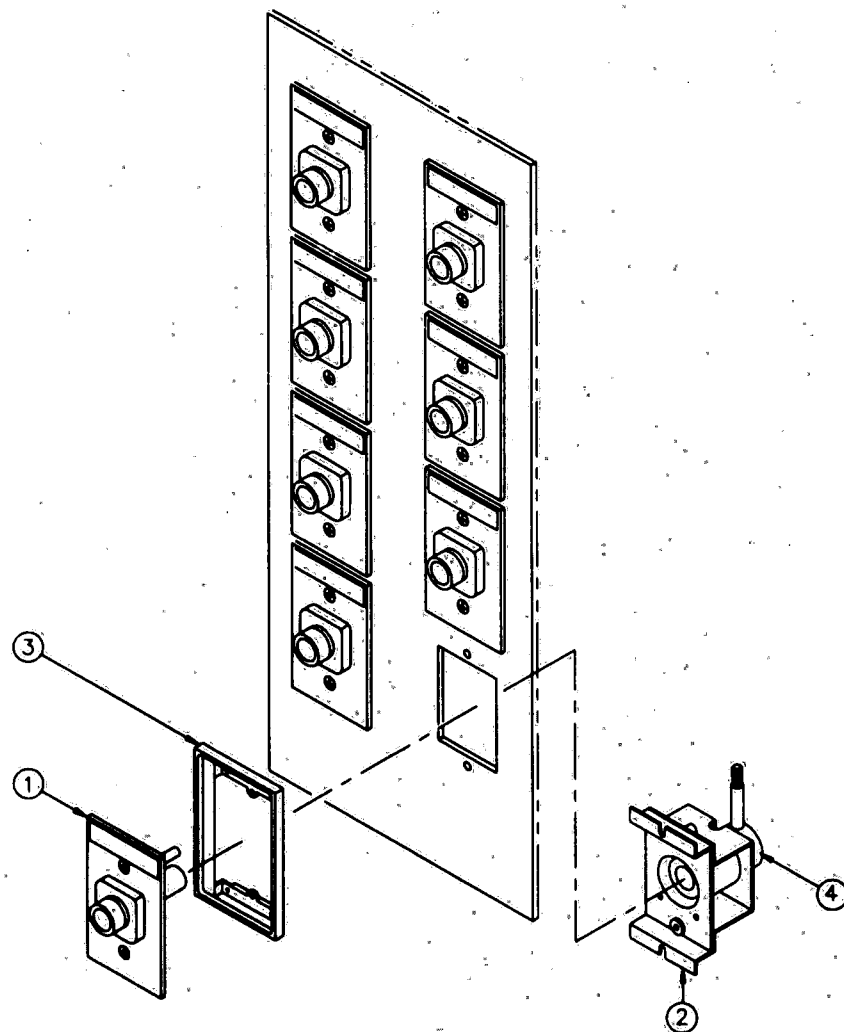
Gas Outlet Assembly, Typical Domestic
